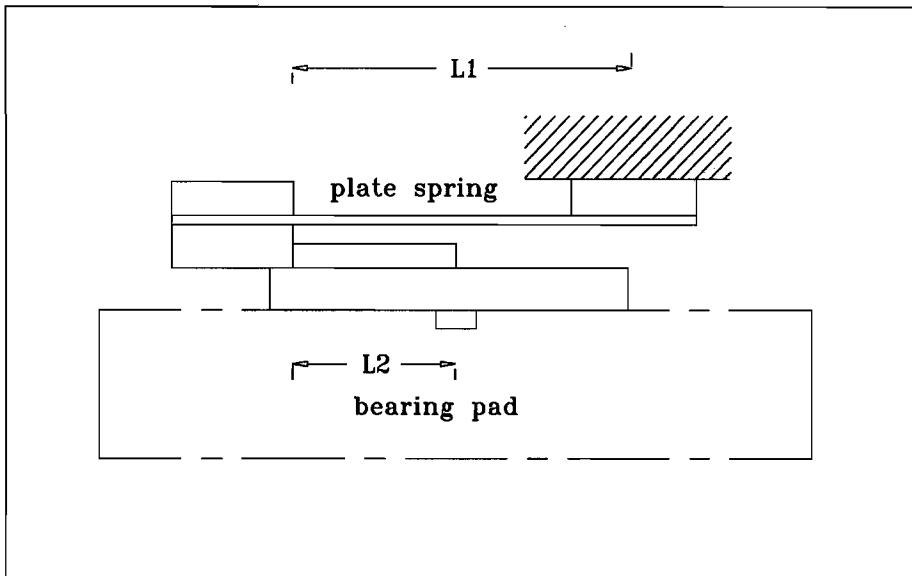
Plate spring mechanisms to mount EPG pads on the slide
